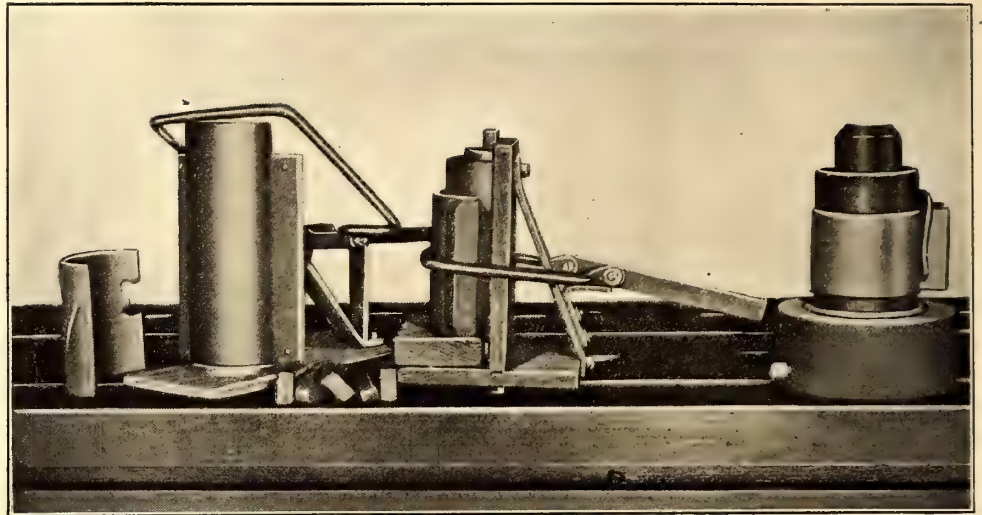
DEVICE FOR BABBITTING BEARINGS
